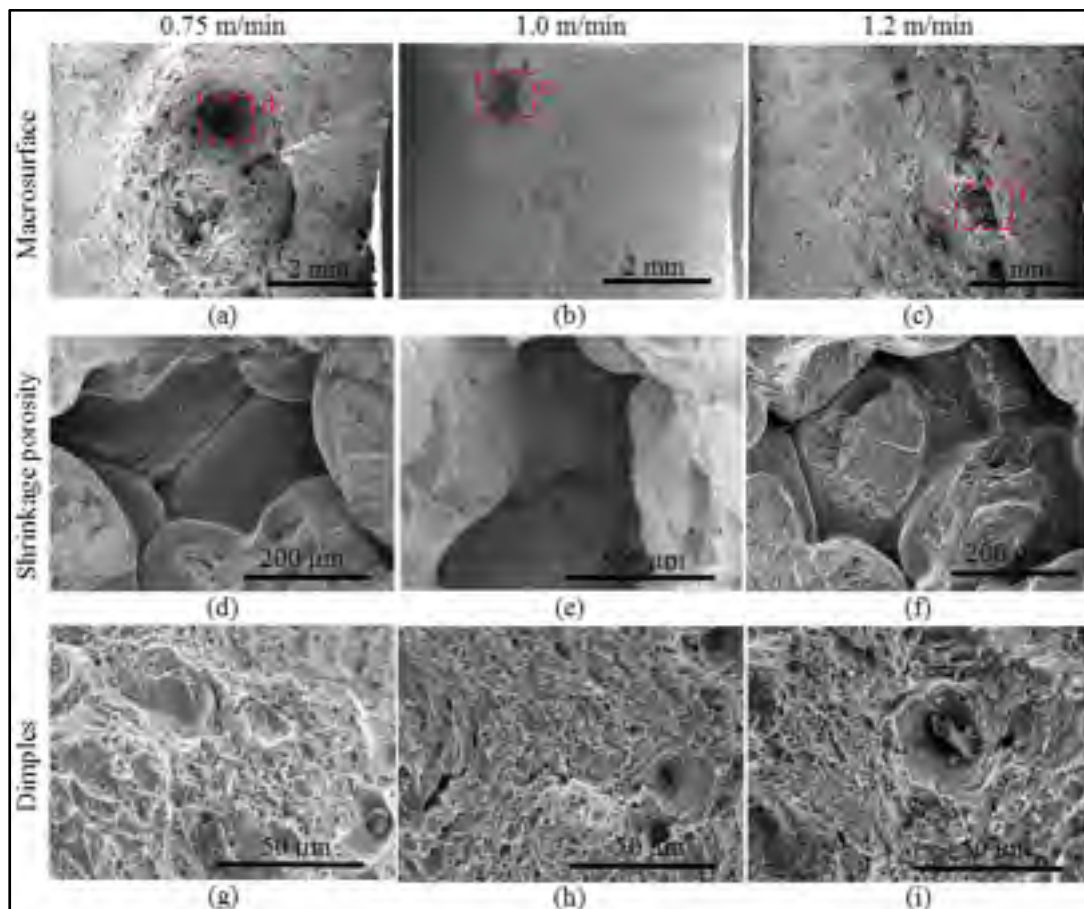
Tensile fracture surfaces of the welds assembled at different welding speeds
